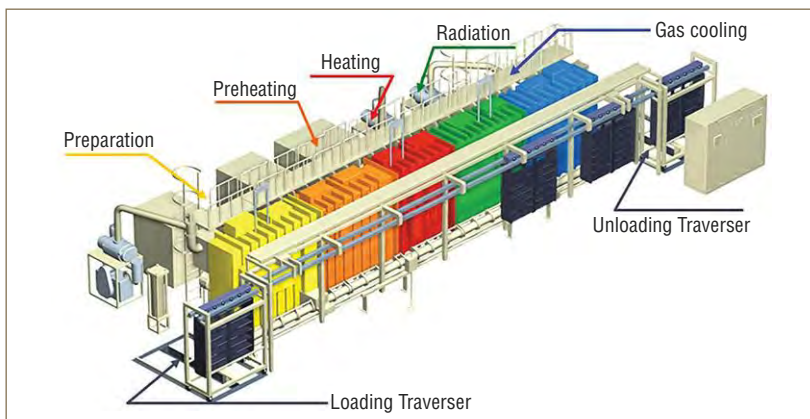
A multi-chamber continuous in-line vacuum heating furnace
